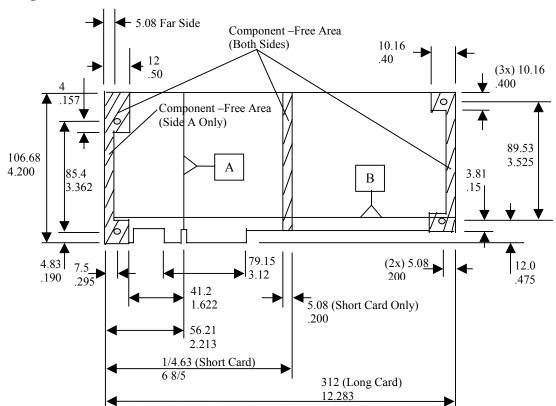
PCI Universal 32-bit Card Mechanical Outline
